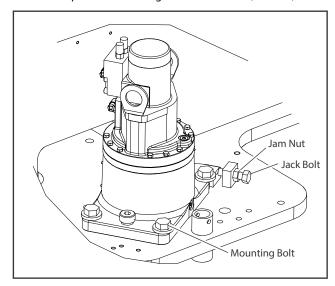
Swing Drive Jam Nut and Mounting Bolt
